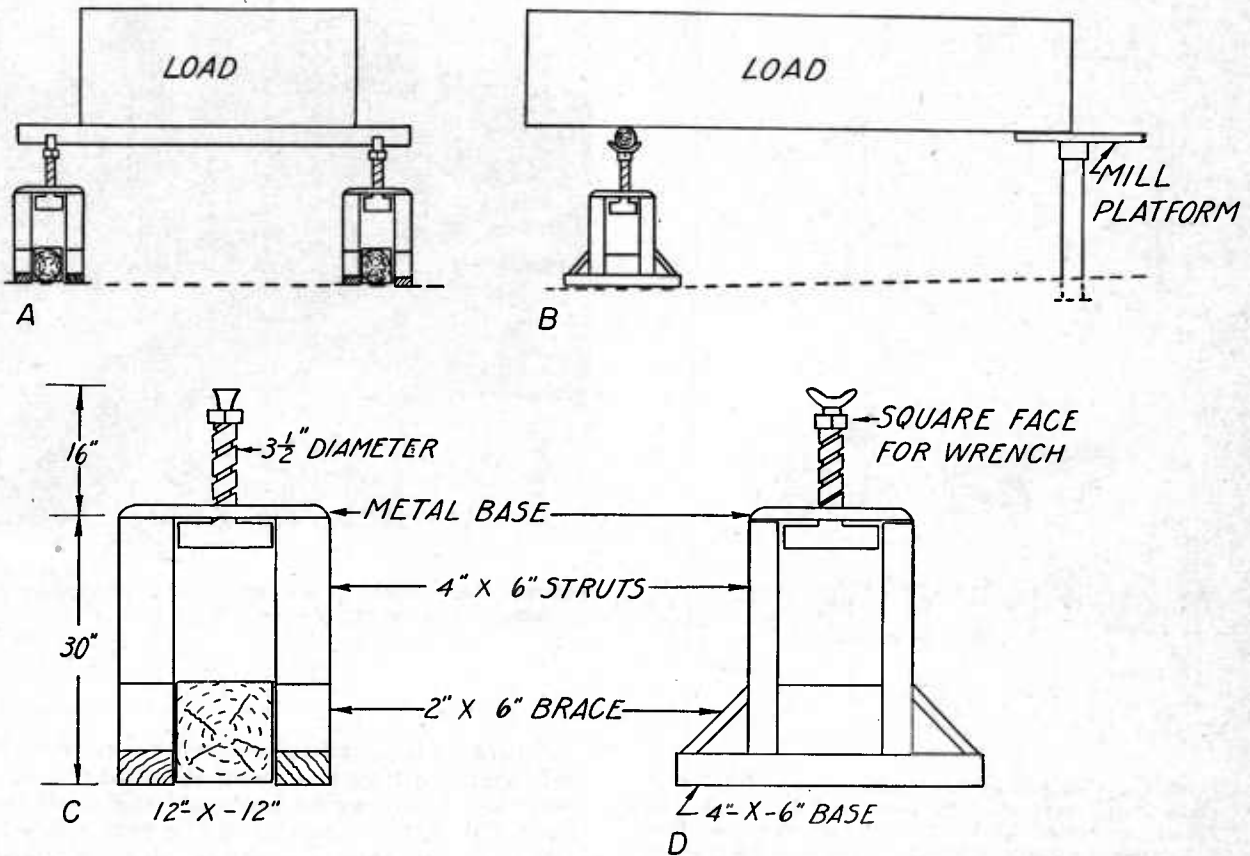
Portable jack supports used for loading out. *A*, End view; *B*, side view; *C* and *D*, end and side views of support.
